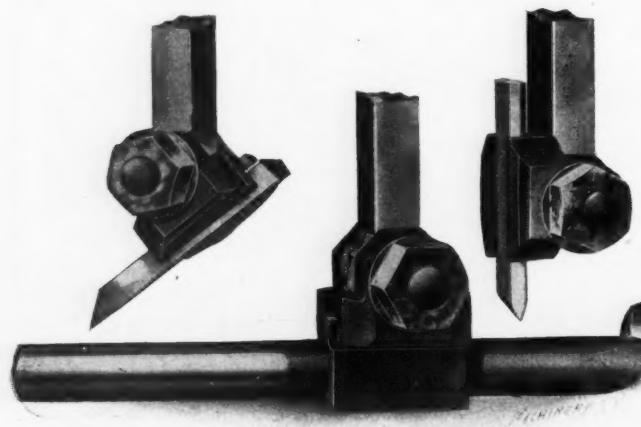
Side-tool, Threading Tool, and Method of Holding Boring Tool
